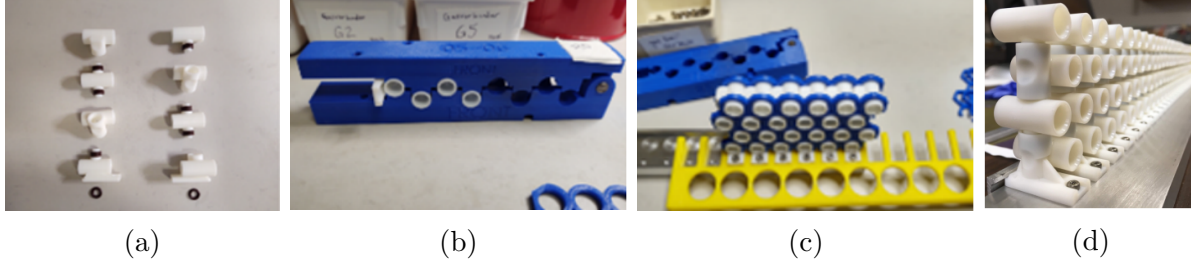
Assembly of the gas distribution manifold. (a) two gas stacks (with opposite chirality) shown before assembly and with o-rings. (b) Gas stack assembly in 3D printed jigging. (c) gas stacks being mounted on a gas bar with more jigging. (d) fully assembled gas bar. Four gas bars are used per chamber.
